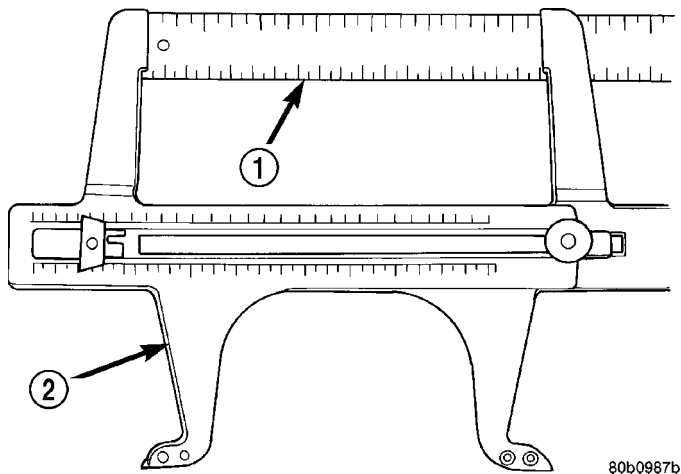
SETTING GAUGE TO PARK BRAKE SHOE MEASUREMENT
